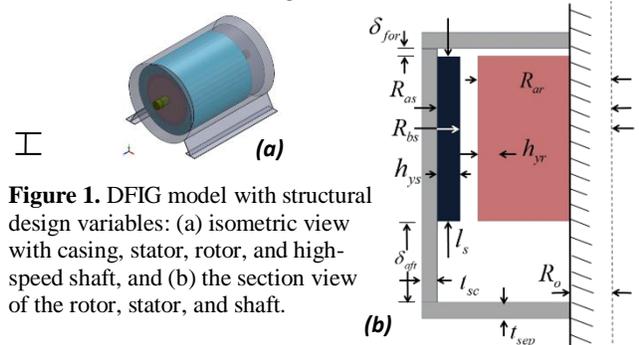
DFIG model with structural design variables: (a) isometric view with casing, stator, rotor, and high-speed shaft, and (b) the section view of the rotor, stator, and shaft.
